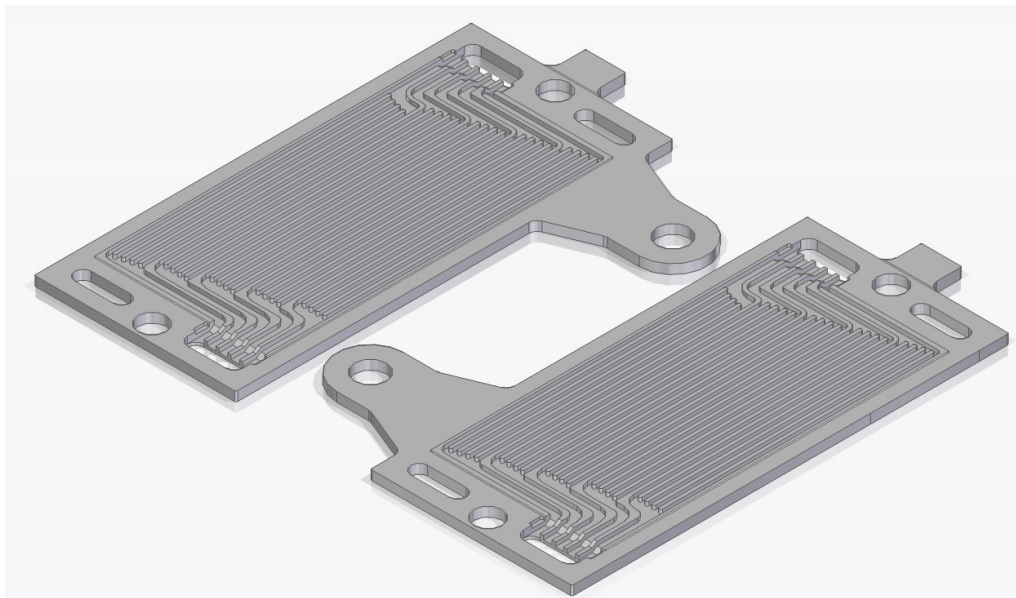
Illustration of the unipolar plates. Dimensions specified in appendix A.3.
